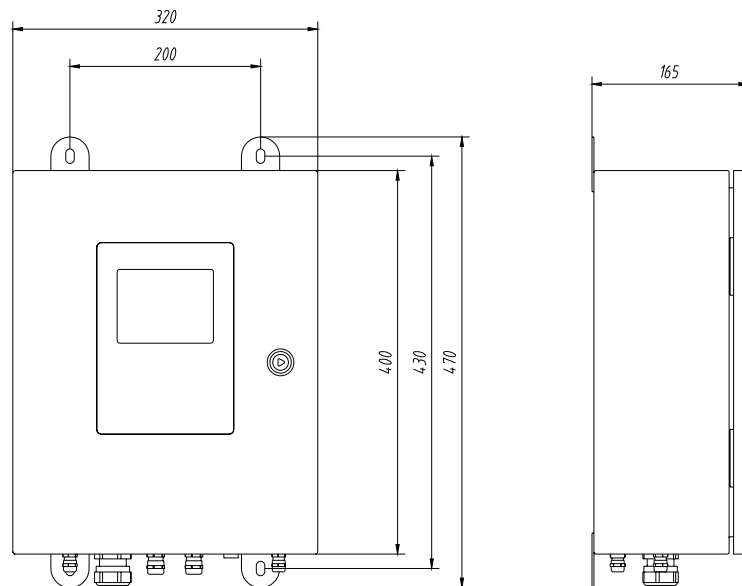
Dimension of the Central Processing Unit (in mm).
